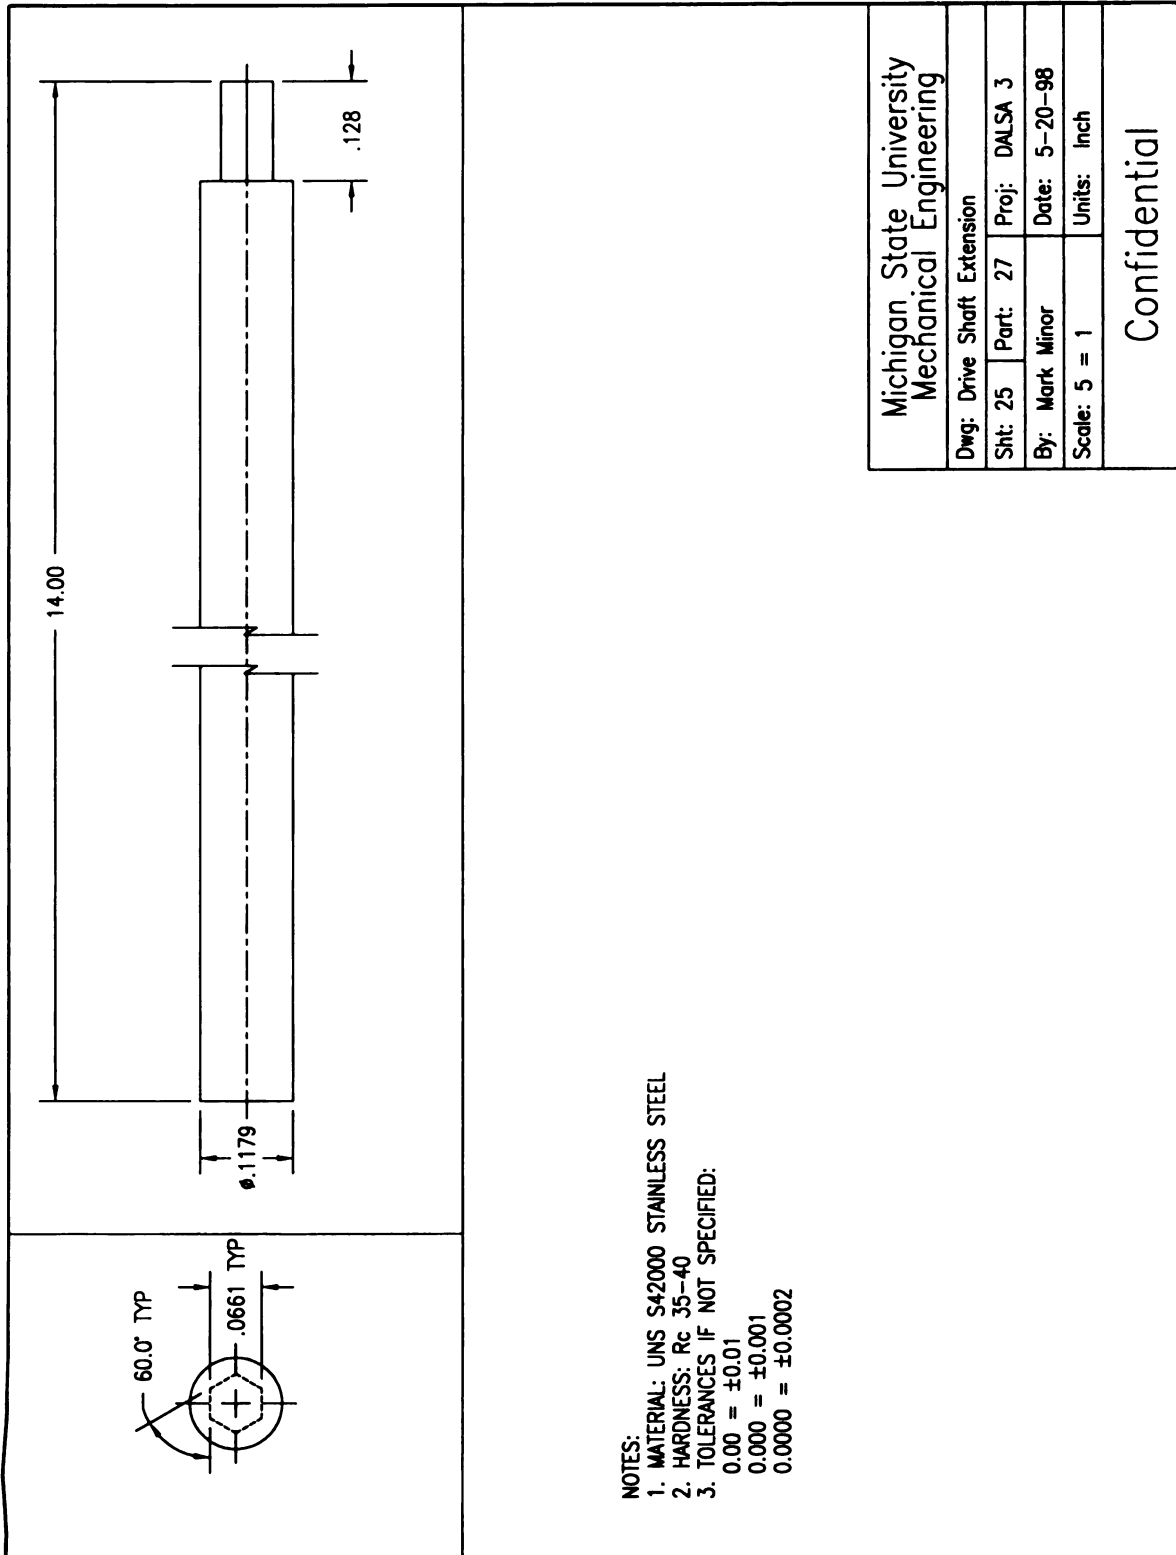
DALSA Component: Drive Shaft Extension (sheet 25).
